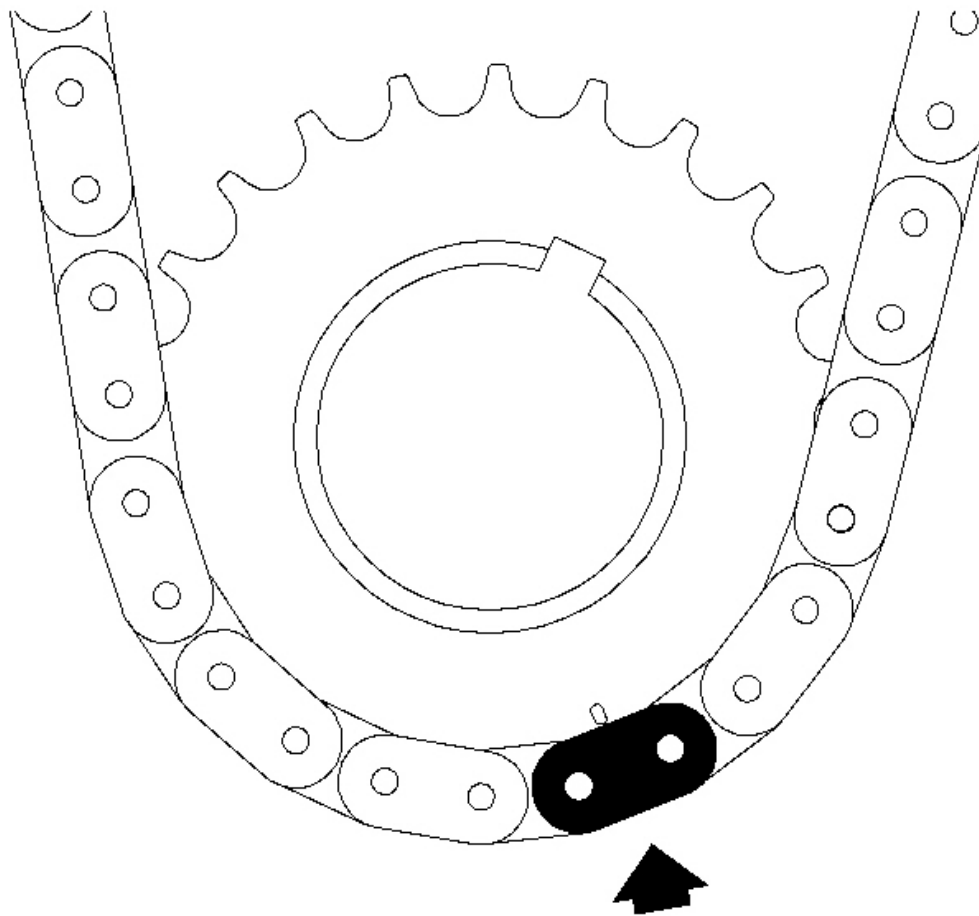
Setting Mark On The Timing Chain Drive Sprocket At 5 O'clock Position
